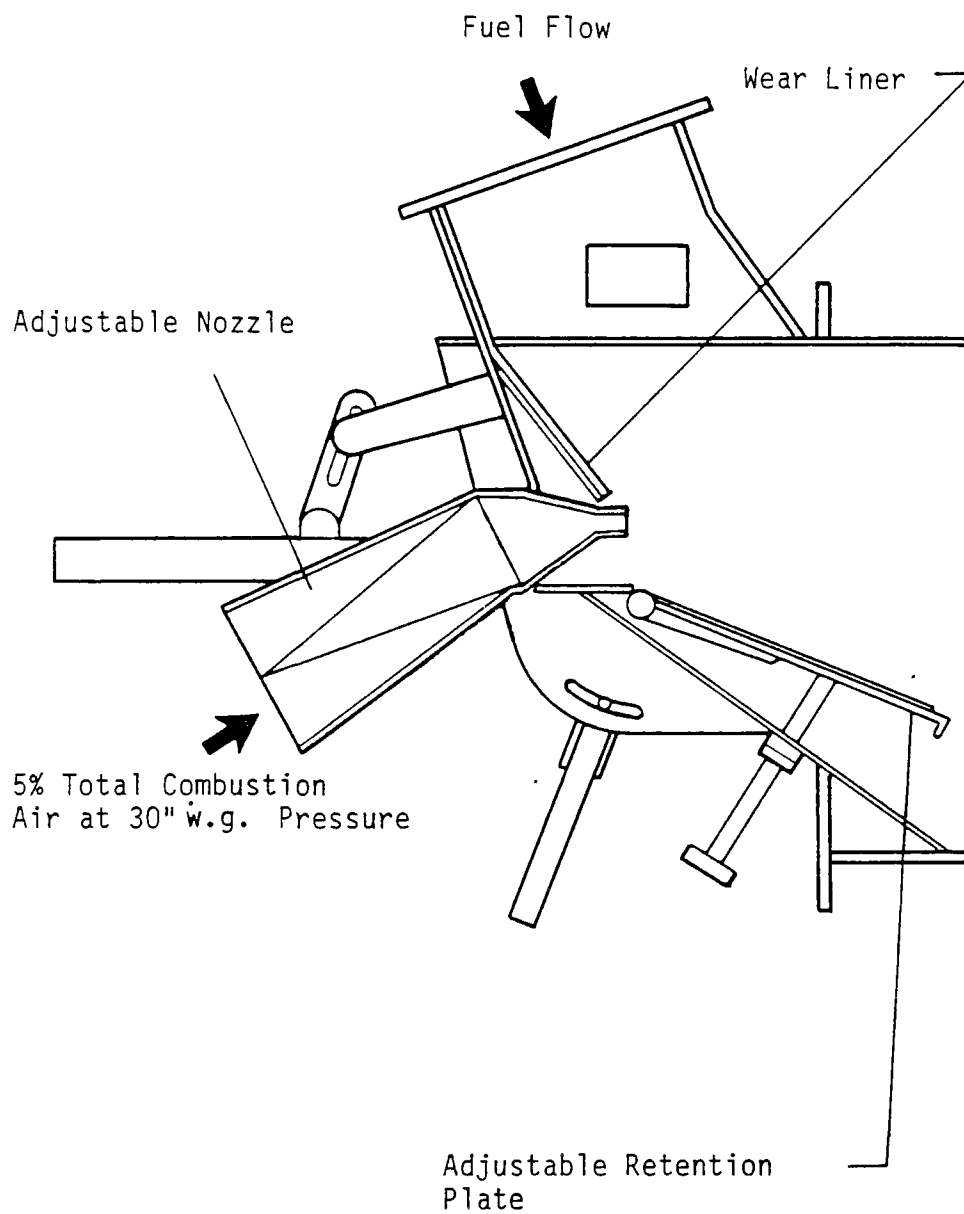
Combustion Engineering pneumatic RDF distributor.
